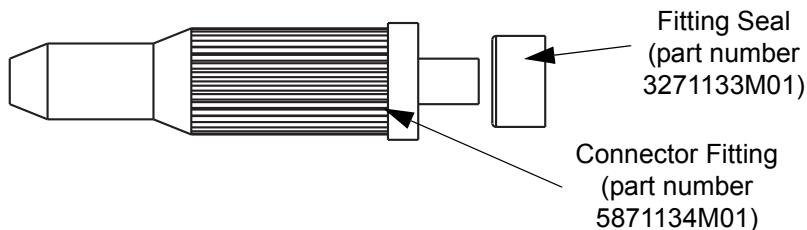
Connector Fitting – Fitting Seal Pump Connector
